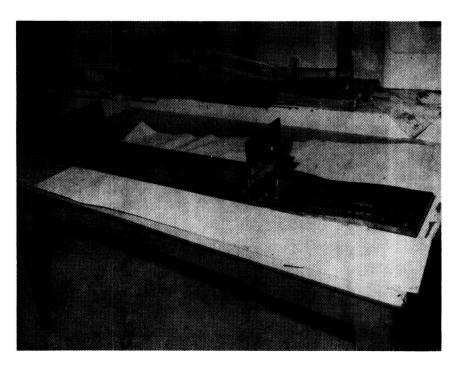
Overall View of CV2 Specimen with Rib Cap Assembly Installed
